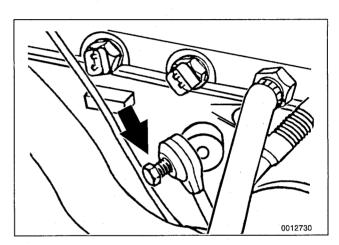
Knock sensor mounting bolt on front left side of cylinder block.
